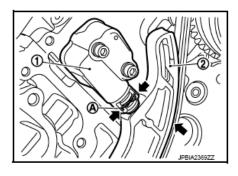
Pressing Spring Against Tension Courtesy of NISSAN NORTH AMERICA, INC.
